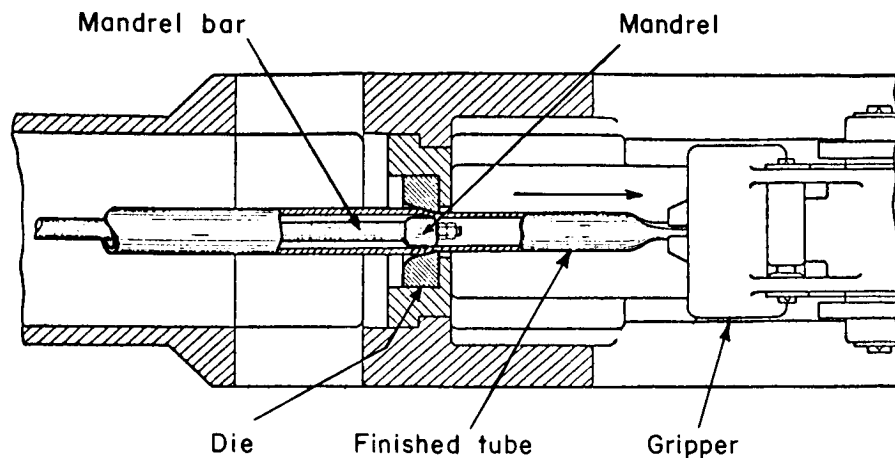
DIAGRAMMATIC VIEW OF DRAWBENCH SHOWING SEAMLESS TUBE IN THE PROCESS OF DRAWING (REF. 48)
